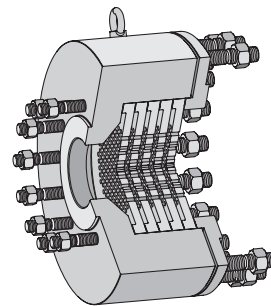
· Sectional drawing of Type 3381-3-5, five-stage
